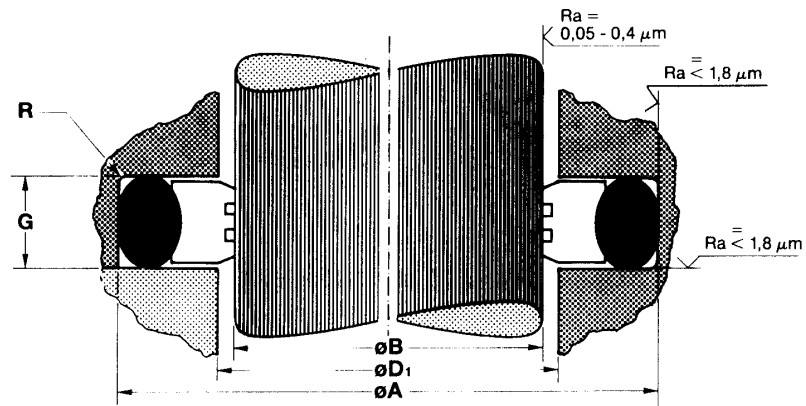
Shamban Roto Glyd Ring used as primary sealing ring on the motor exit shaft. With a clearance of 0.1 mm in radius, the rated pressure is 300 bars. An elastomeric ring presses the teflon ring against the shaft. The rear of the teflon ring is shaped to fit the O-ring.
